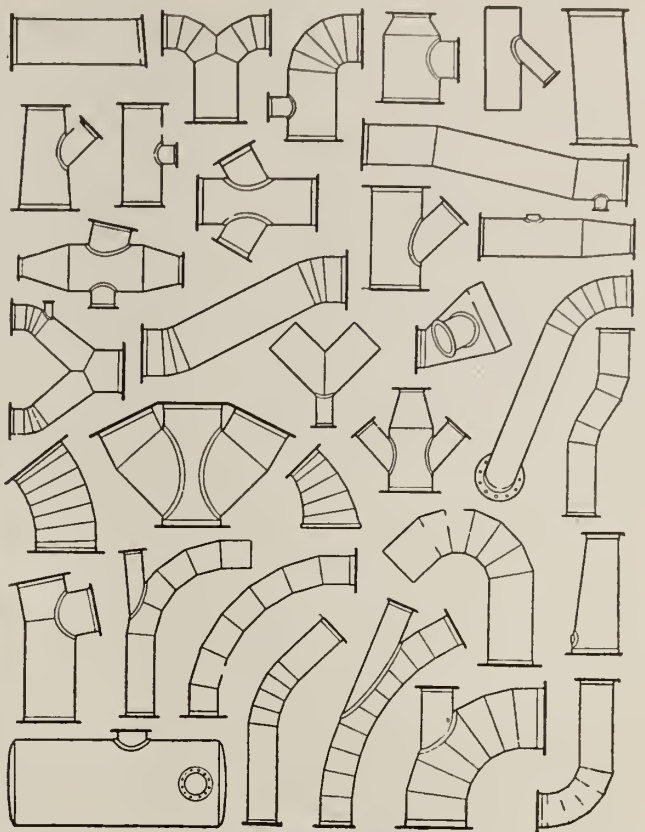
SPECIAL STEEL PLATE FITTINGS
